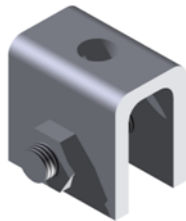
BEAM BRACKET W/HEX HEAD MACHINE BOLT
